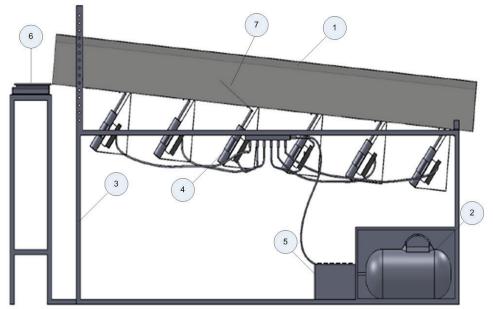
The grading machine model; 1) duct; 2) pneumatic pump; 3) frame 4 Pneumatic cylinder; 5) electrical motor; 6) weight sensing unit; 7) chute
